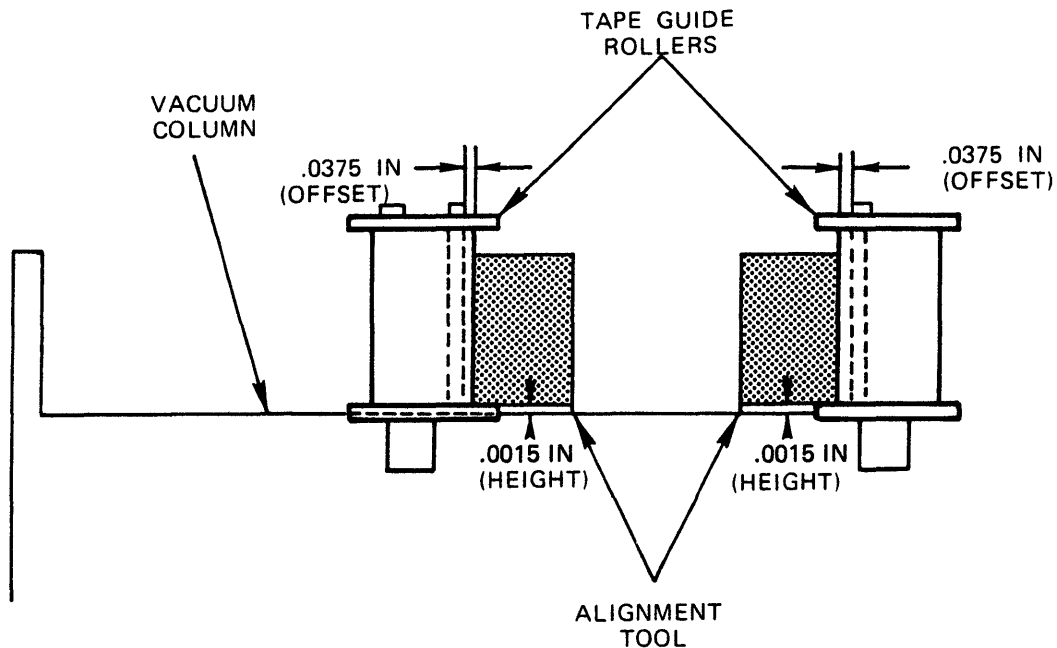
Fixed Tape Guide Alignment Tool Positioning
